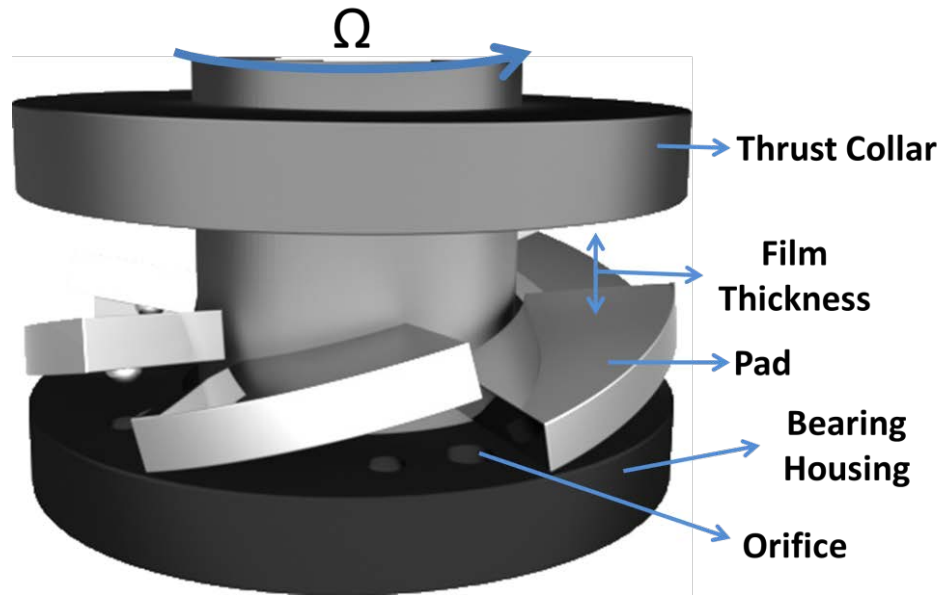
Schematic view of a tilting pad thrust bearing (Film thickness and pad tilts exaggerated). Ω is the rotor speed.
